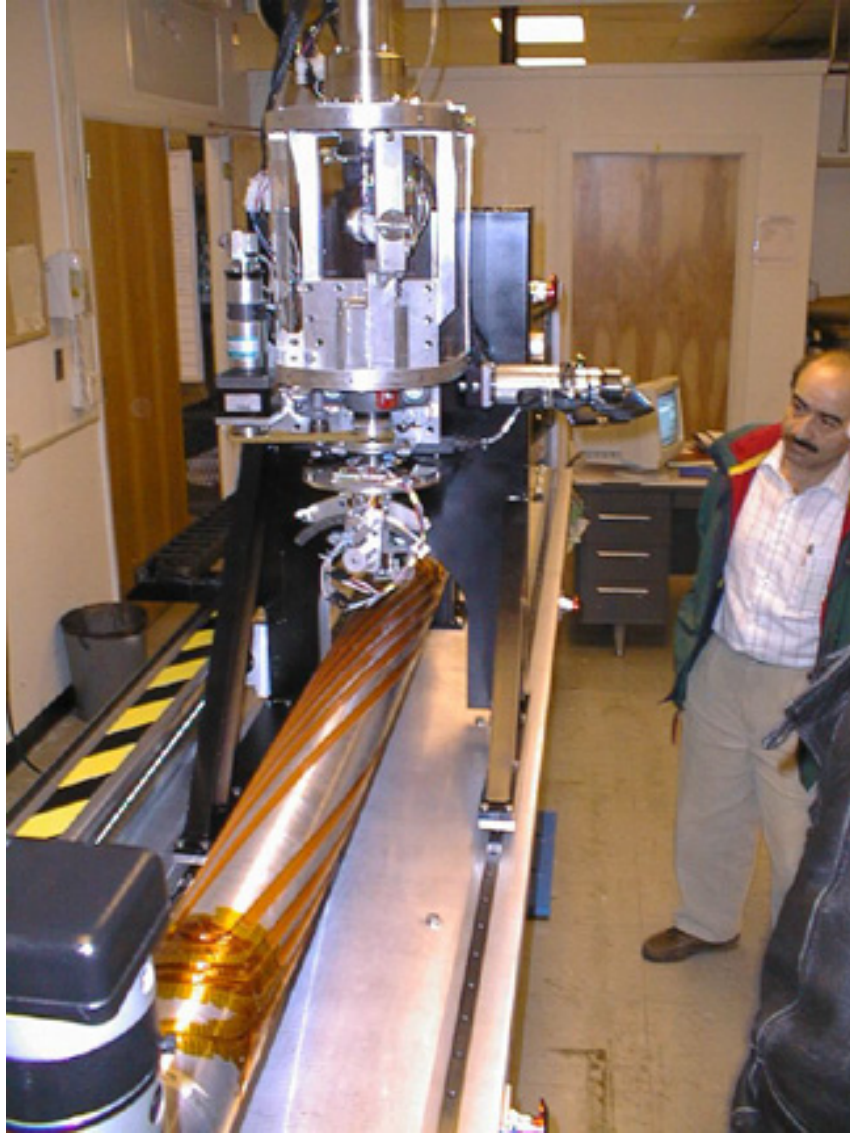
Automatic winding machine used for helical dipole coil production.
